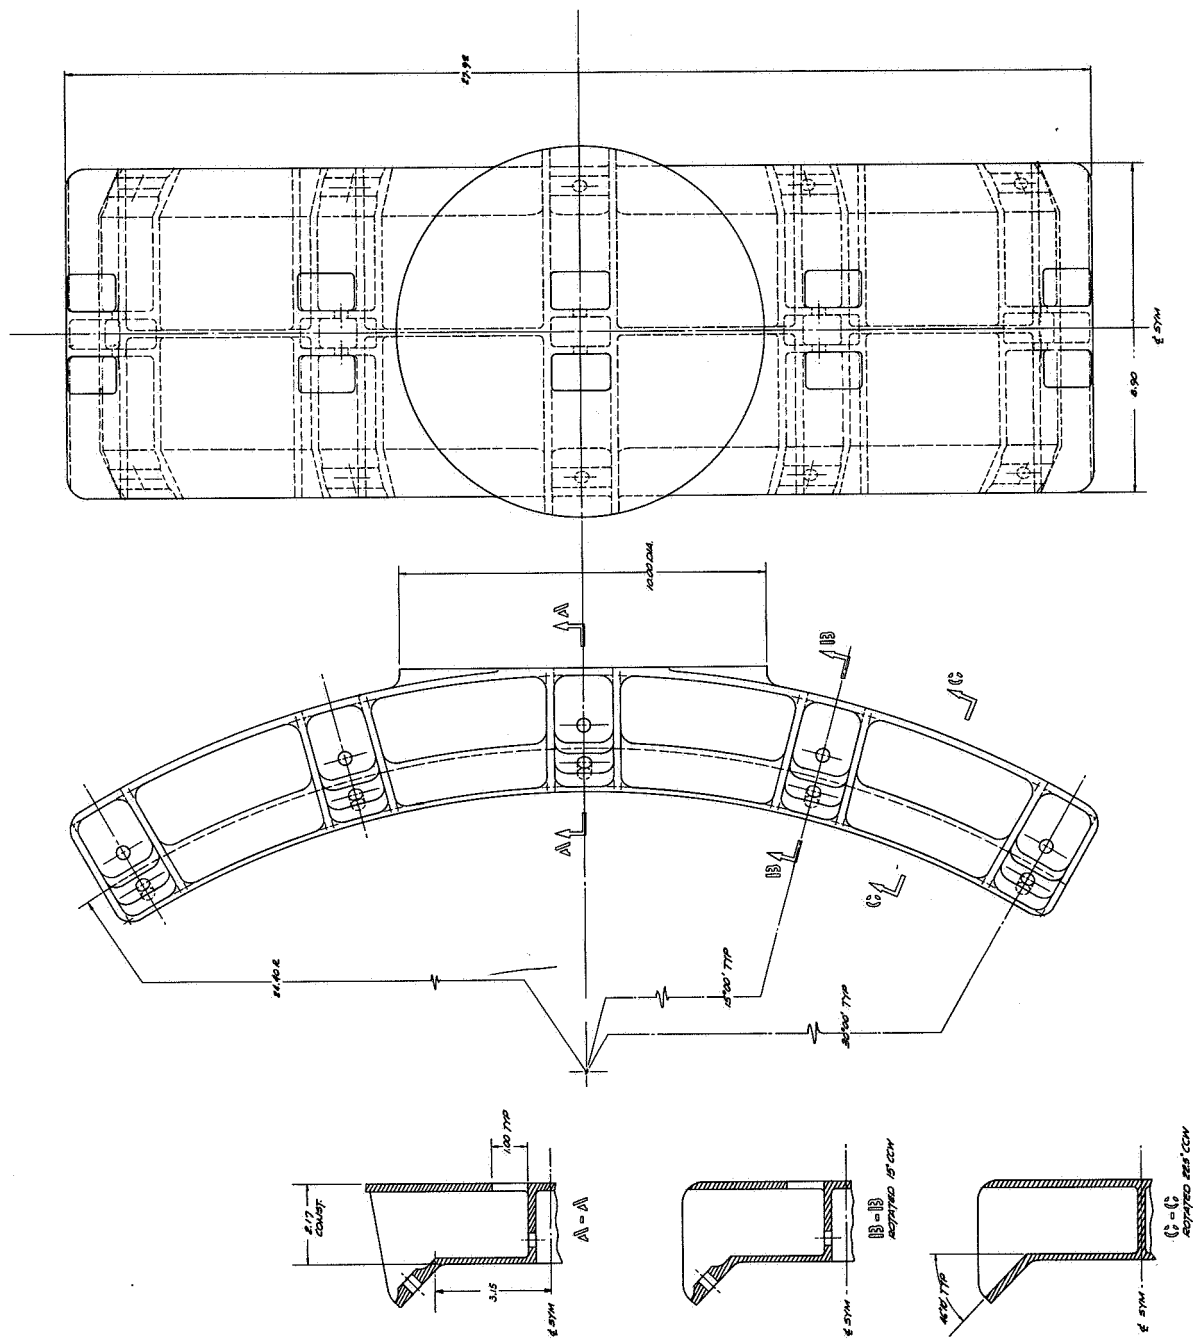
, 5. Main Rotational Frame and Arm/Counterweight Drive Frame Structural Assembly.
